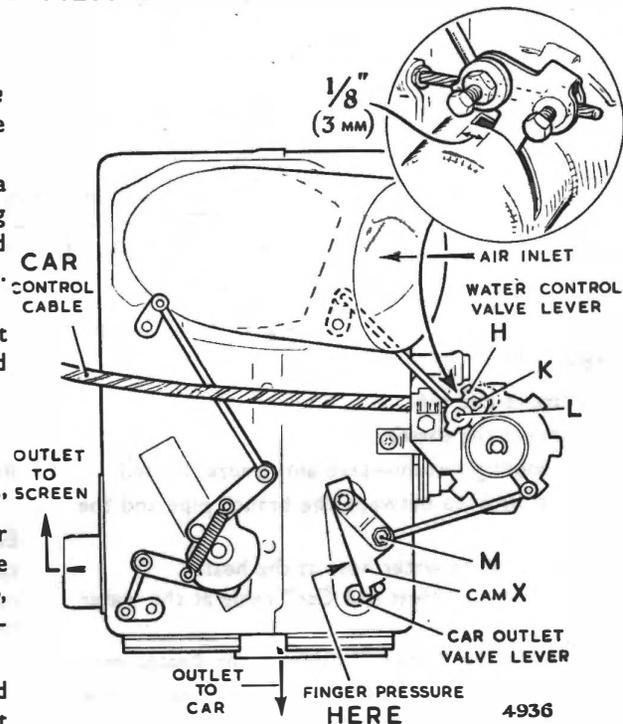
Car control, water valve, air mixing valve and air outlet valve adjustment details
